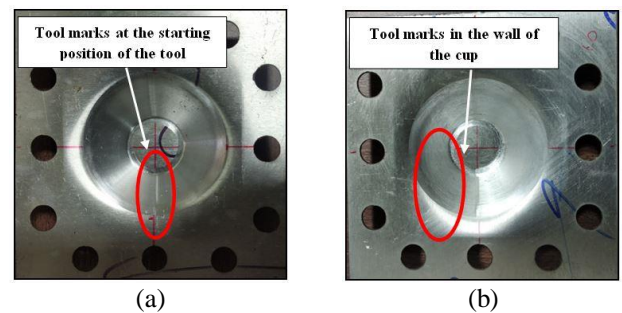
Tool markings for UV marked blanks in SPIF process: a) 0.5 mm thick blank; b) 1.0 mm thick blank
